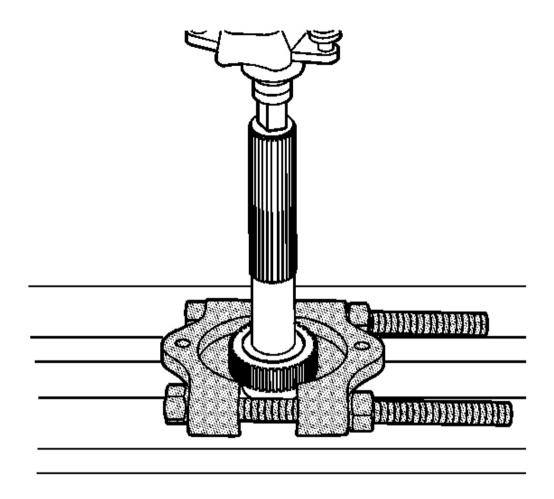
Removing Speed Reluctor Wheel With J 22912-01 Courtesy of GENERAL MOTORS CORP.
